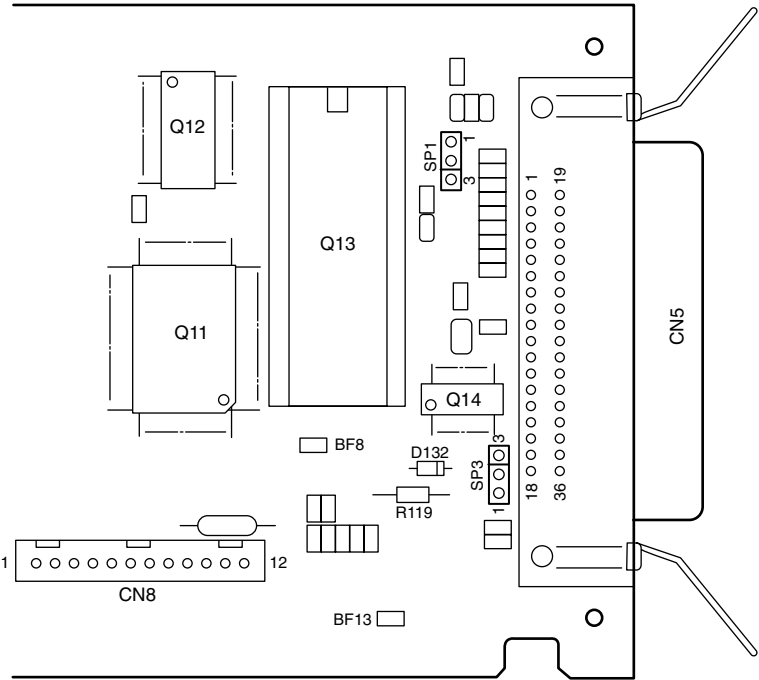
Checkpoints of printed circuit board(Cotrol Board)
